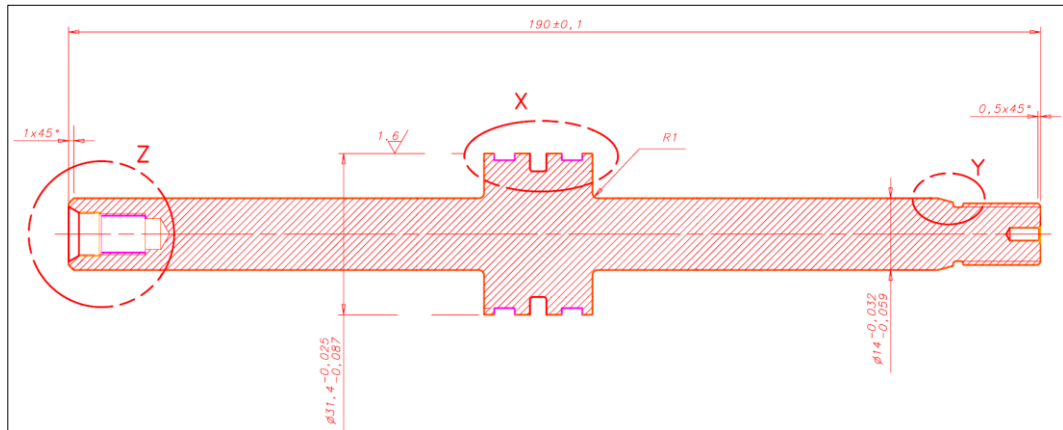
Technical Drawing of the Hydraulic Cylinder Piston
